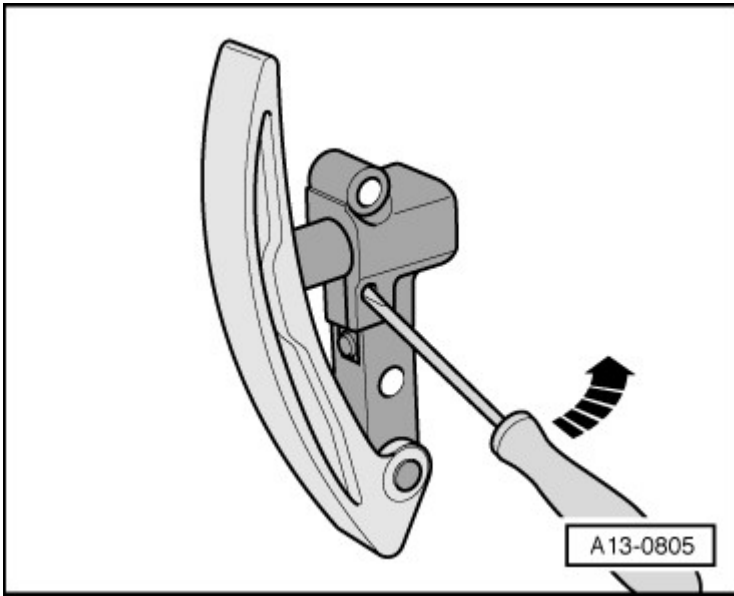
Identifying Small Screwdriver To Release Locking Splines Of Chain Tensioner
